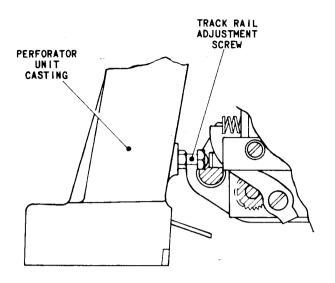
CORRECTOR TRACK RAIL ADJUSTMENT MECHANISM
